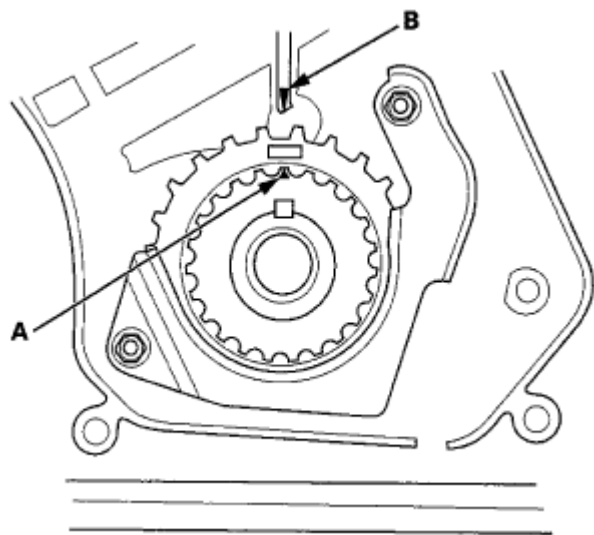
Identifying TDC Mark On Tooth Of Timing Belt Drive Pulley And Pointer On Oil Pump
